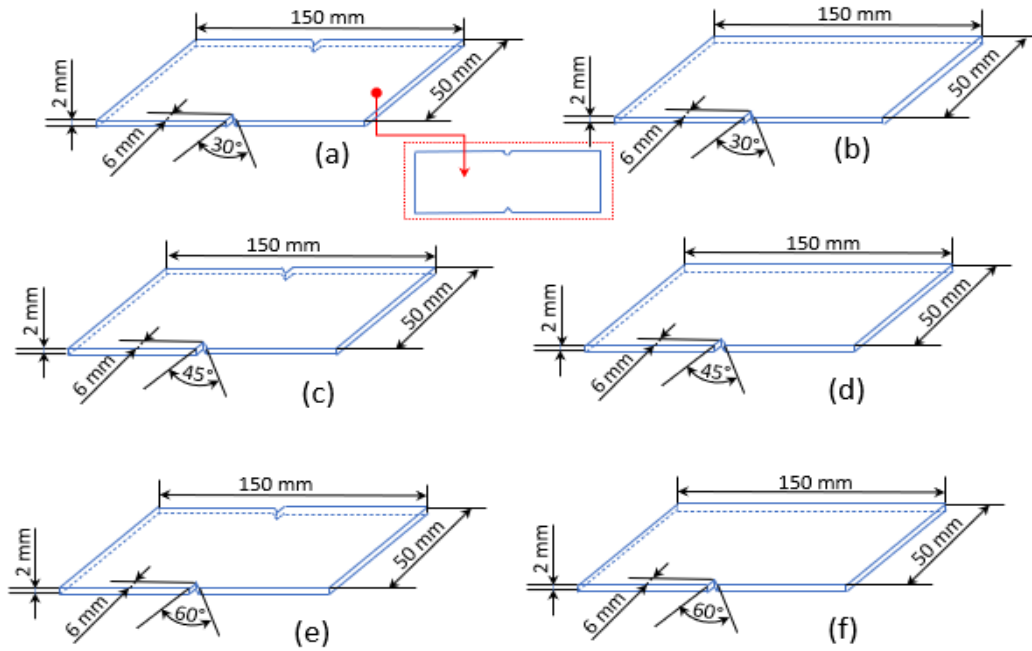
Dimensions of Al 5083 plates with notch length 6 mm, notch angles 30° (a, b), 45° (c, d), and 60° (e, f) (single and double sided).
